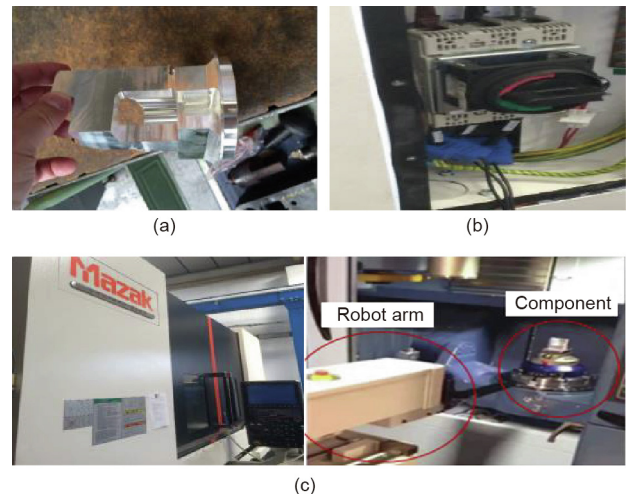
CNC machining processes. (a) Machined part; (b) power measurement; (c) Mazak machine and machining processes.
